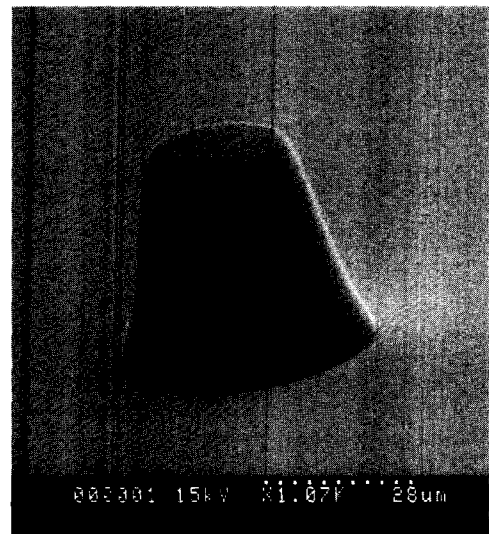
SEM image of the fabricated horn shape mold of the antenna
